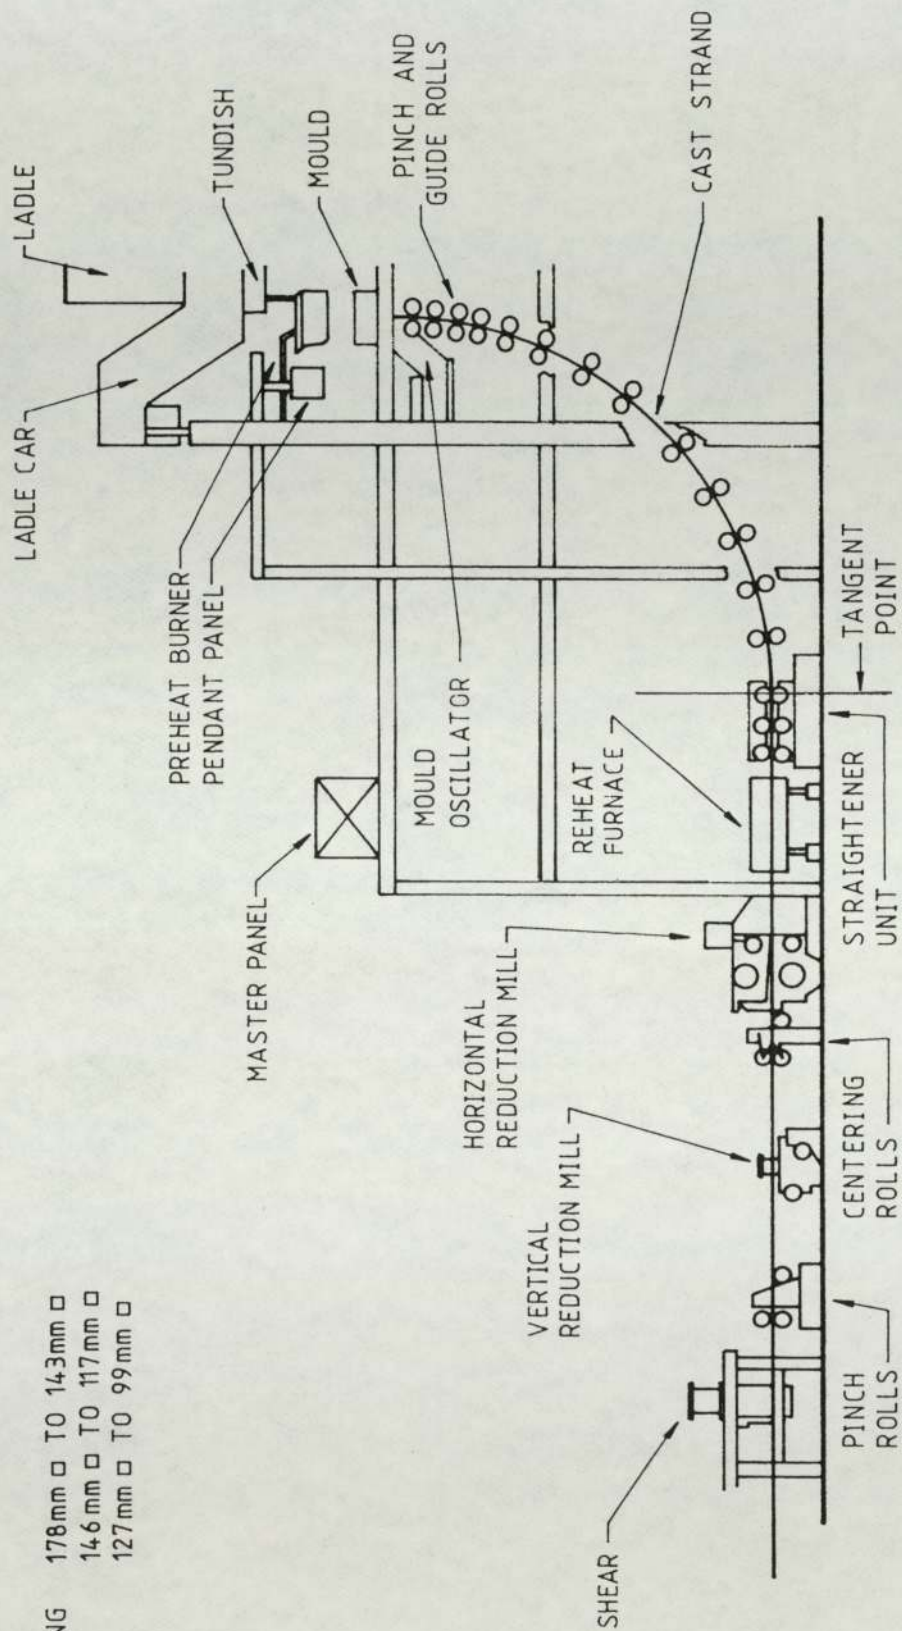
CONTINUOUS CASTING MACHINE WITH IN-LINE ROLLING.
